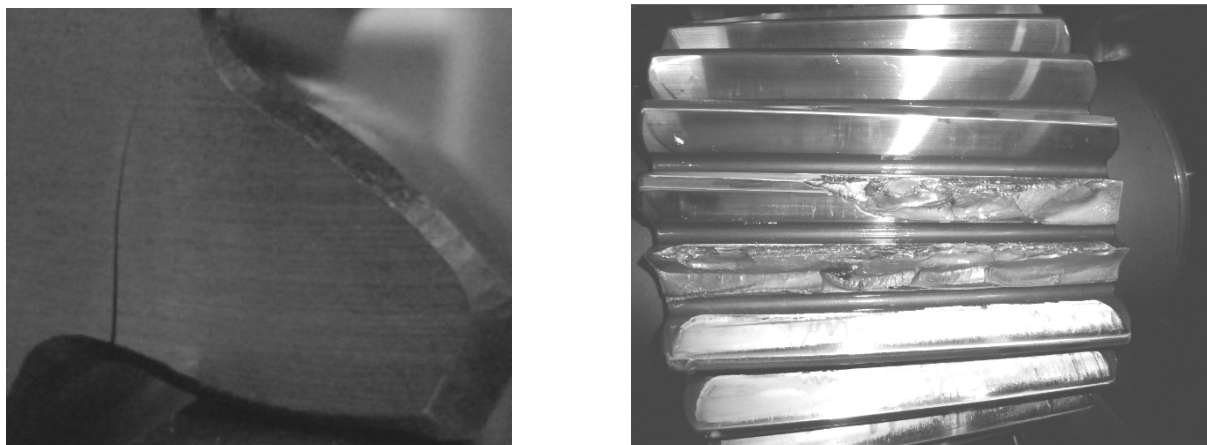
Examples of tooth breakage – initializations of damage and examples of flank breakage.
